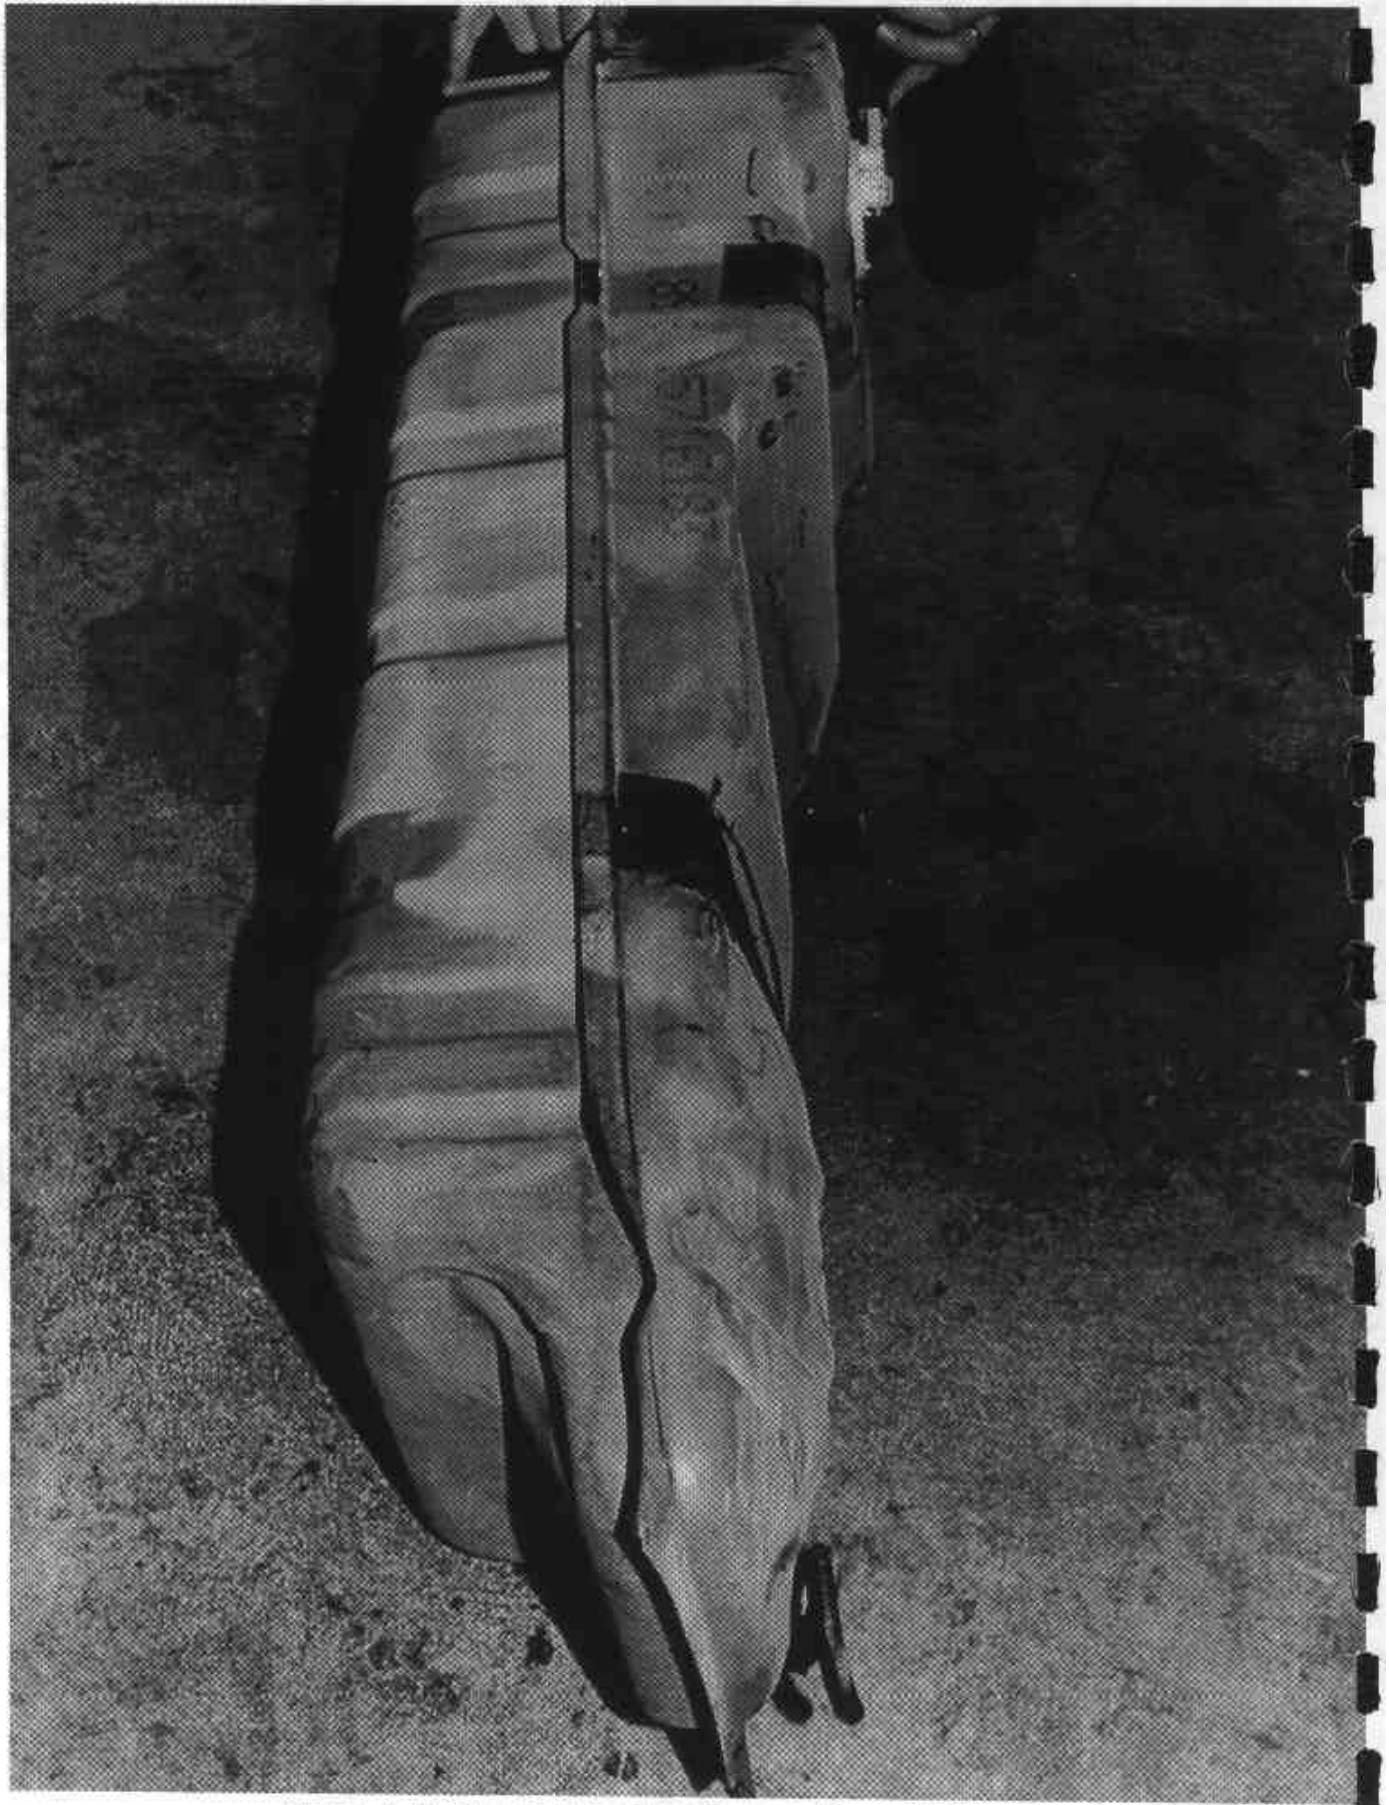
Post-Test Fuel Tank Removed From Vehicle - View 6
